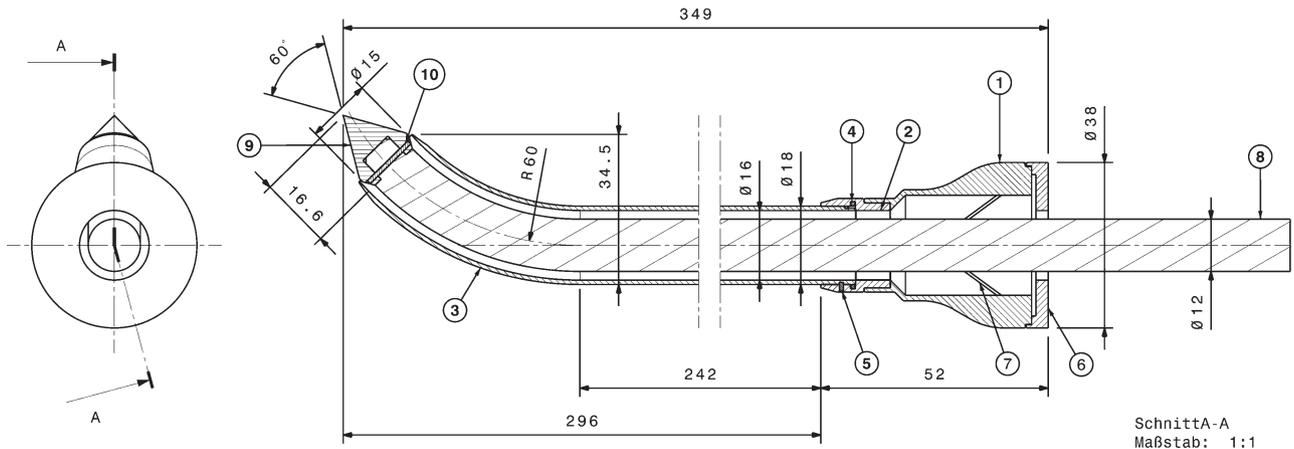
Cross-section of the ISSA trocar with inserted part flexible obturator; (1) trocar head, (2) trocar adapter, (3) trocar tube, (4) O-ring seal, (5) bayonet mechanism, (6) front cap, (7) trocar valve, (8) part flexible obturator, (9) conic front end, and (10) pin.
